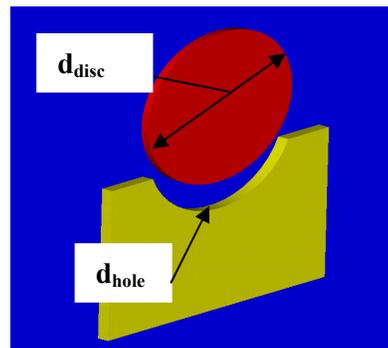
Curvilinear model of the welded joint (injection molded disc and plaque will be joined together by linear vibration welding)
